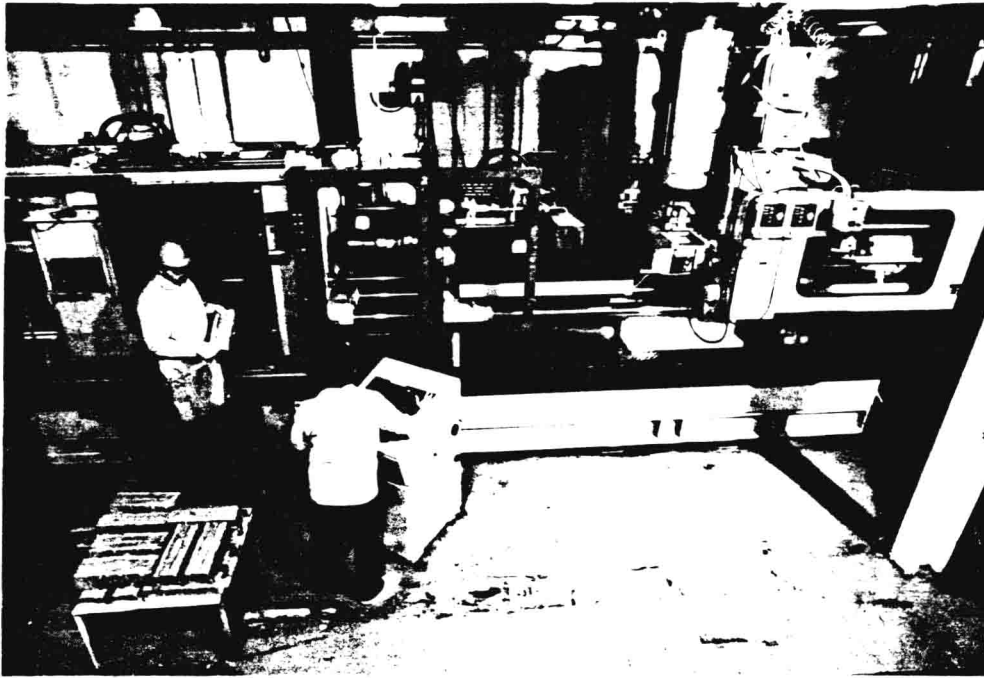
Pictorial illustration of the LIM process as practiced in developmental scale-up using a 715 ton reciprocating screw injection molding machine.
